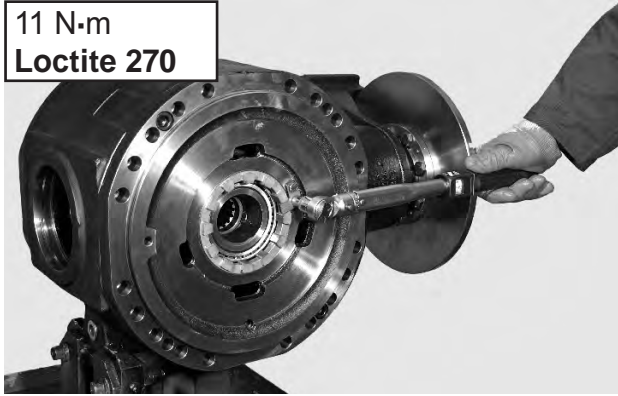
Engage screw (1) in the slot next to the holes provided for the check screws. Coat screws with Loctite 270 and tighten to a torque of 11 N·m.
